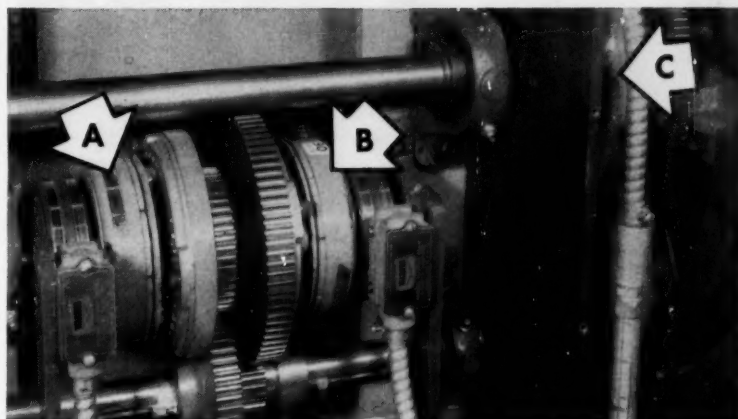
Two Warner PC-500 electric clutches control wire feed roll. Armatures are mounted on drive pins to special hubs on slow- and fast-feed drive gears. Slow-speed clutch (B) is at the right, and fast-speed clutch (A) is at the left. Warner electric brake (C) assures precise stopping of roll for each index.
